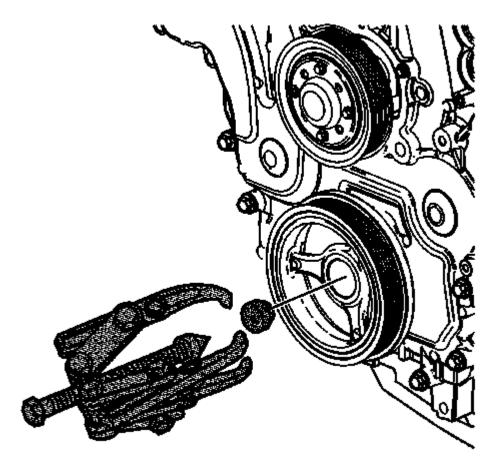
View Of J 38416-2 In Nose Of Crankshaft Courtesy of GENERAL MOTORS COMPANY
